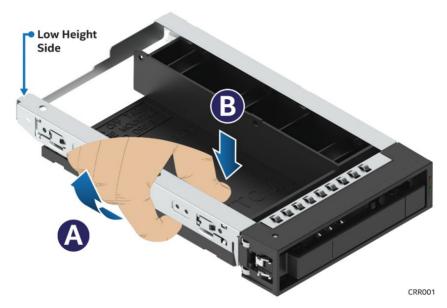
3.5" Drive Carrier Assembly - Drive Blank Removal
